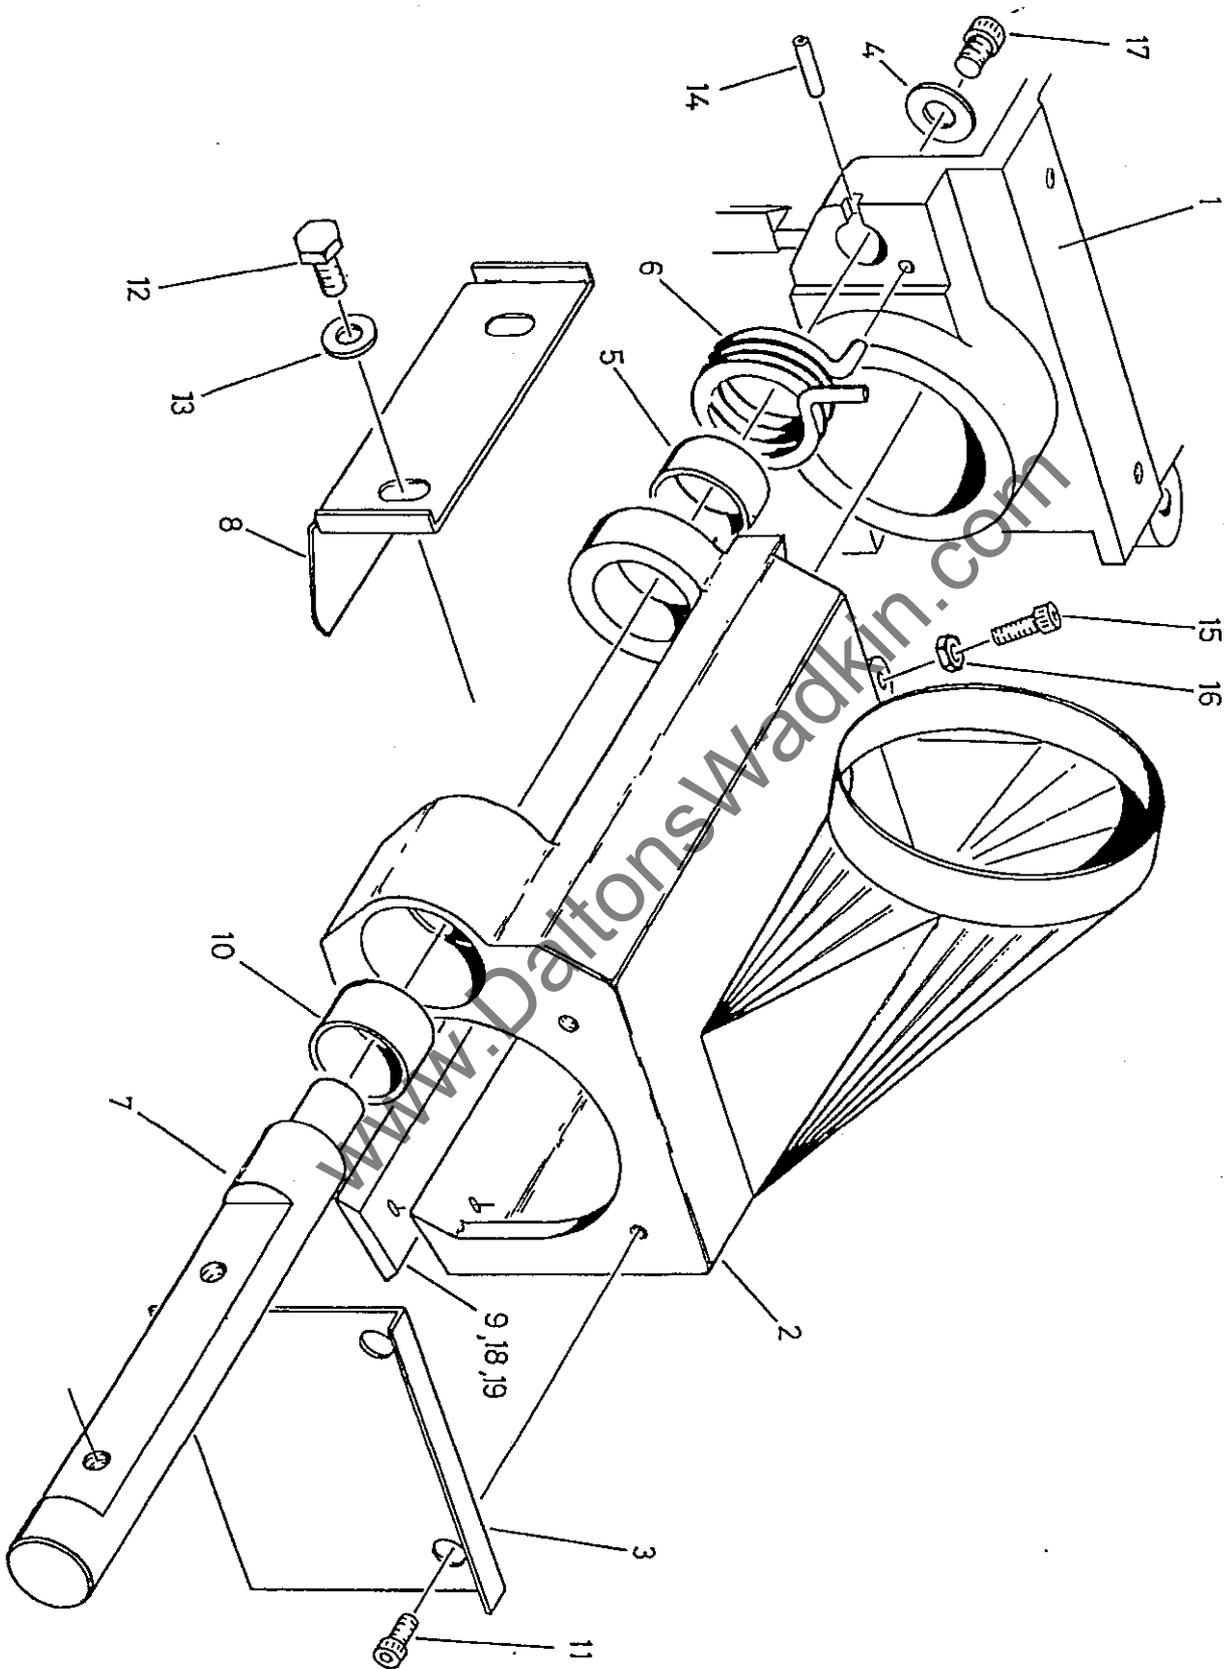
TOP HEAD HOOD AND CHIPBREAKER (220)
